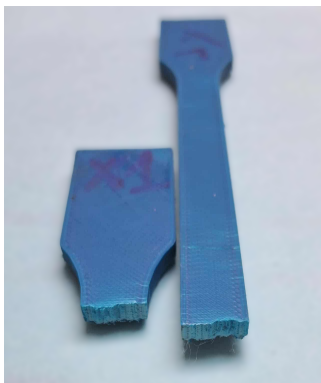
shows that specimens failed via brittle fracture. This failure is attributed to weak interlayer bonding and stress concentrations from internal voids, both inherent to the FDM process.
